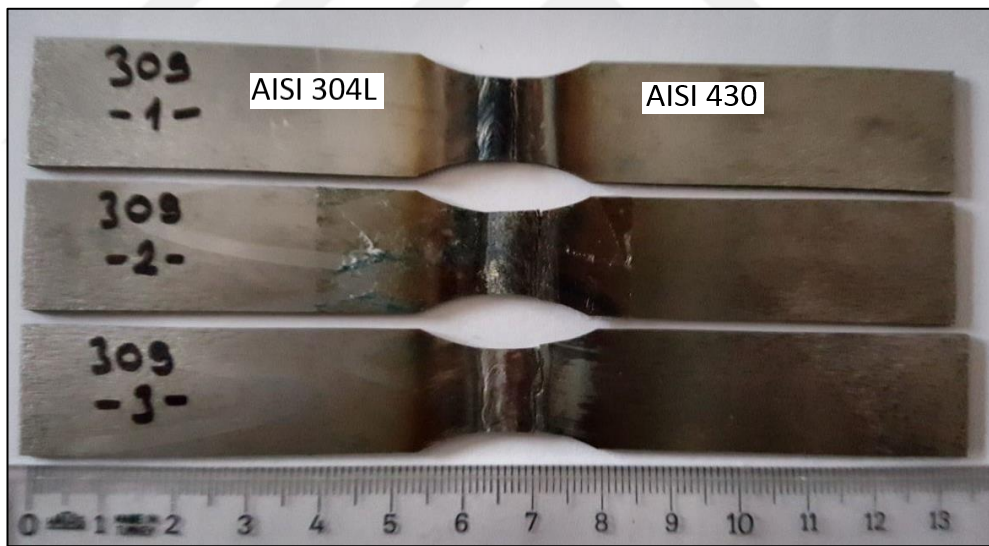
Macro photographs of the refraction areas of the Standard B welded tensile specimens combined with ER309 additional wire.
